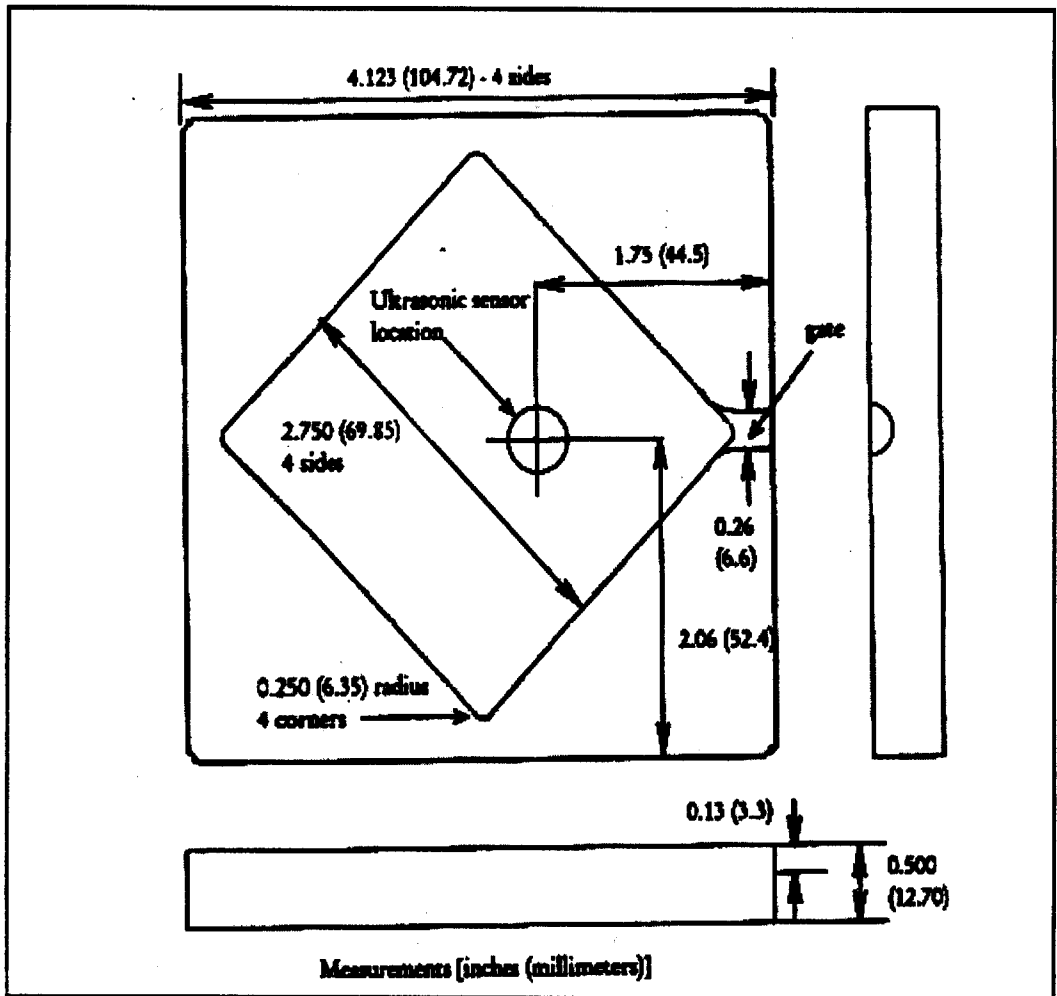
A schematic illustration showing the geometry and dimensions of one side of the Mold Insert used during the studies. The position of the Ultrasonic Sensor is also indicated. The specimen produced with this insert is a flat plate. The mating side of the insert is a flat surface. (Source: Hongerholt D.D., Rose J.L., German R.M., "A Self-Turning Ultrasonic Sensor Based Powder Injection Moulding Process". NDT&E International, Vol.30, No.6, pp 394, 1997)
